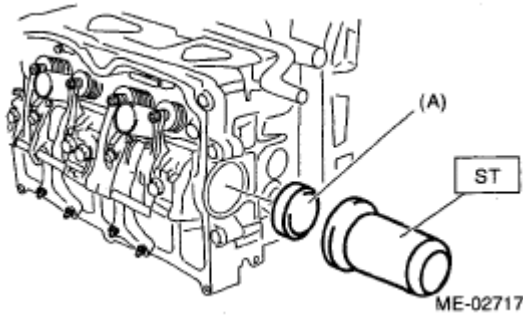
Applying Coat Of Engine Oil To Plug Periphery And Install Plug Using ST
